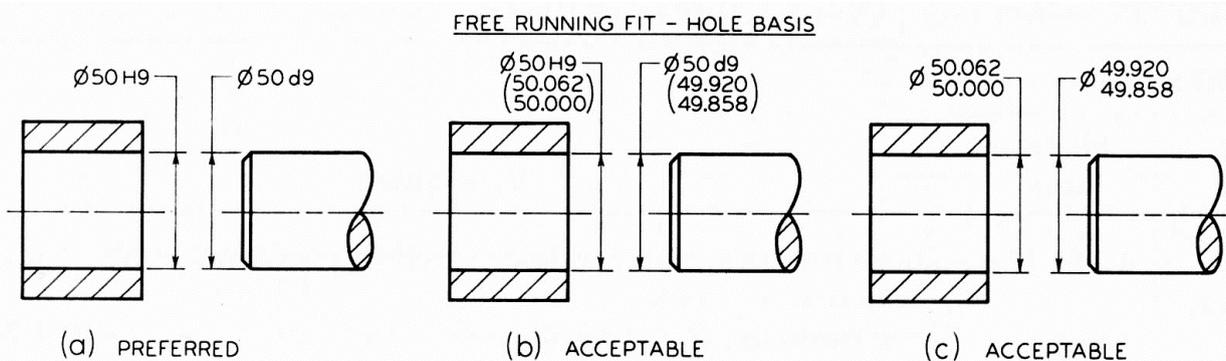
Methods of Specifying Tolerances for Mating Parts
